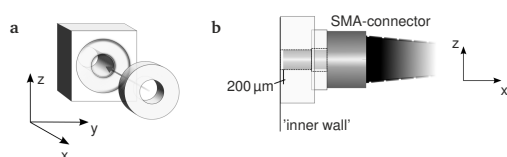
a Detail of plug-optics assembly. To fabricate the plug-optics connector, a cylindrical socket with a design-diameter of 3 mm is laser-cut into 5 mm thick PMMA applying the optimized conditions $P = 100$, $S = 5$ and $F = 5000$ at 1200 dpi using the Epilog Mini 24 laser writer. Subsequently, the thickness of the block is reduced in a concentric circular area by laser engraving applying 'raster' conditions of $P = 35$, $S = 12$ and $F = 5000$ at 1200 dpi. A 3 mm thick PMMA disk comprising a cylindrical socket with 3.5 mm design-diameter cut applying $P = 100$, $S = 5$ and $F = 5000$ and equally reduced in thickness by laser-engraving. The disk is glued into the pre-structured area on the 5 mm thick PMMA. b A SMA fiber-connector plugged into the described unit is firmly clamped, leaving the end-facet at a distance of approximately 200 μm from the 'inner wall'.
